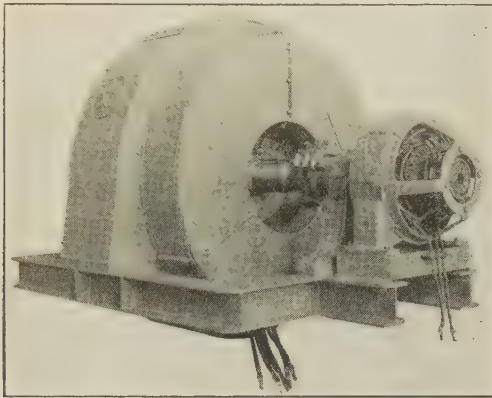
WELDED BEAM BASE FOR 2500-KV-A. SYNCHRONOUS CONDENSER
